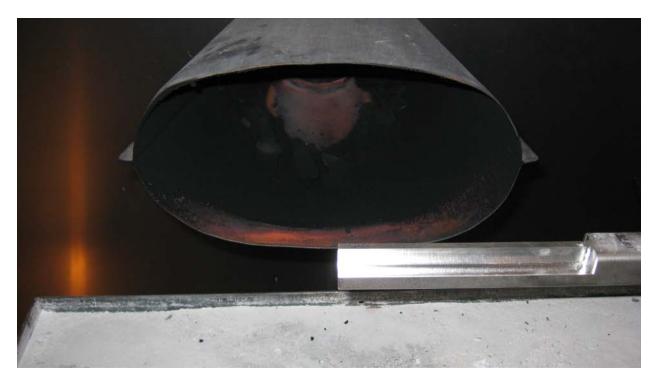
Thin T-Beam Cross-Section Sample Machined From Seat-Leg Component, Front View (9/27/2011)
